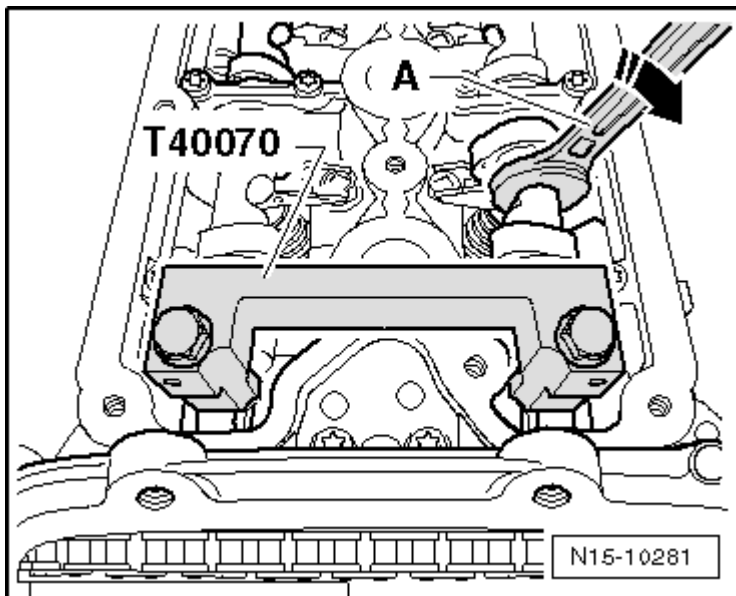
Attempting To Rotate Exhaust Camshaft At Recess Using An Open-End Wrench
